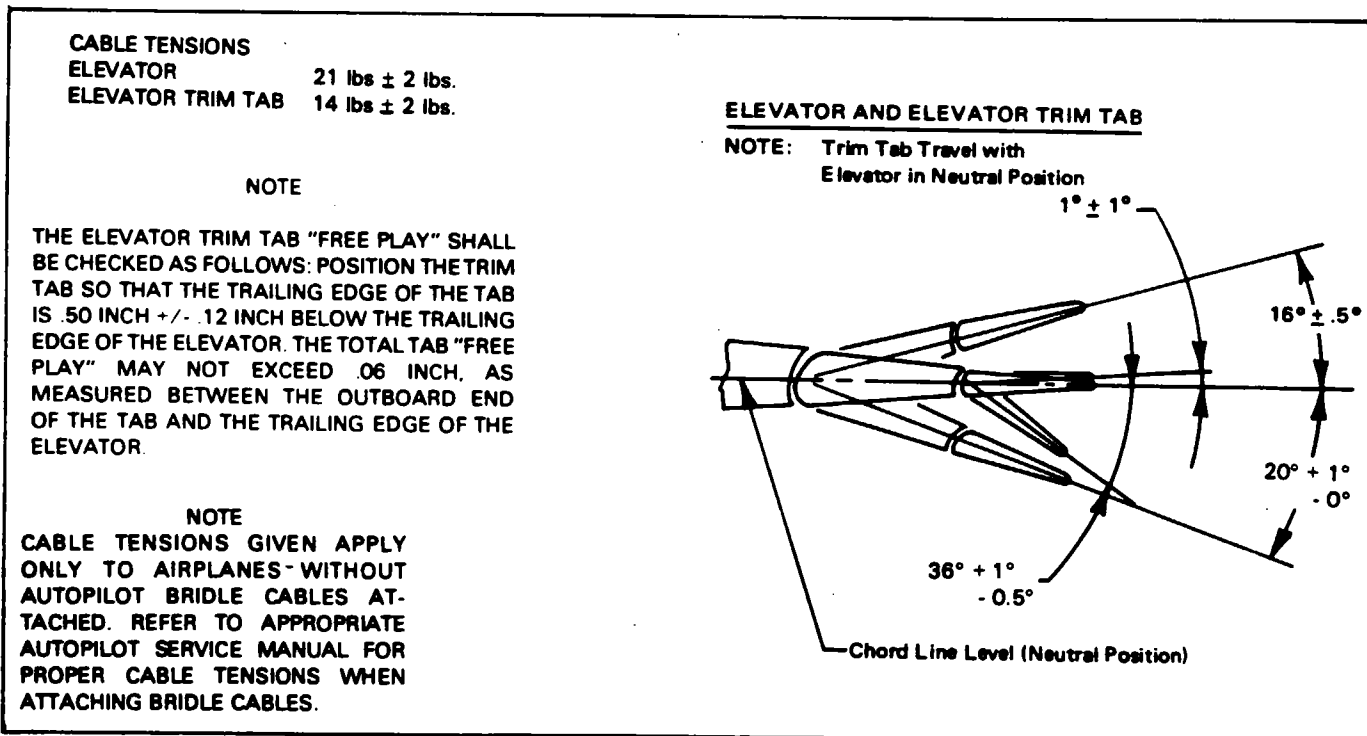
Elevator and Elevator Trim - Travels and Cable Tensions
